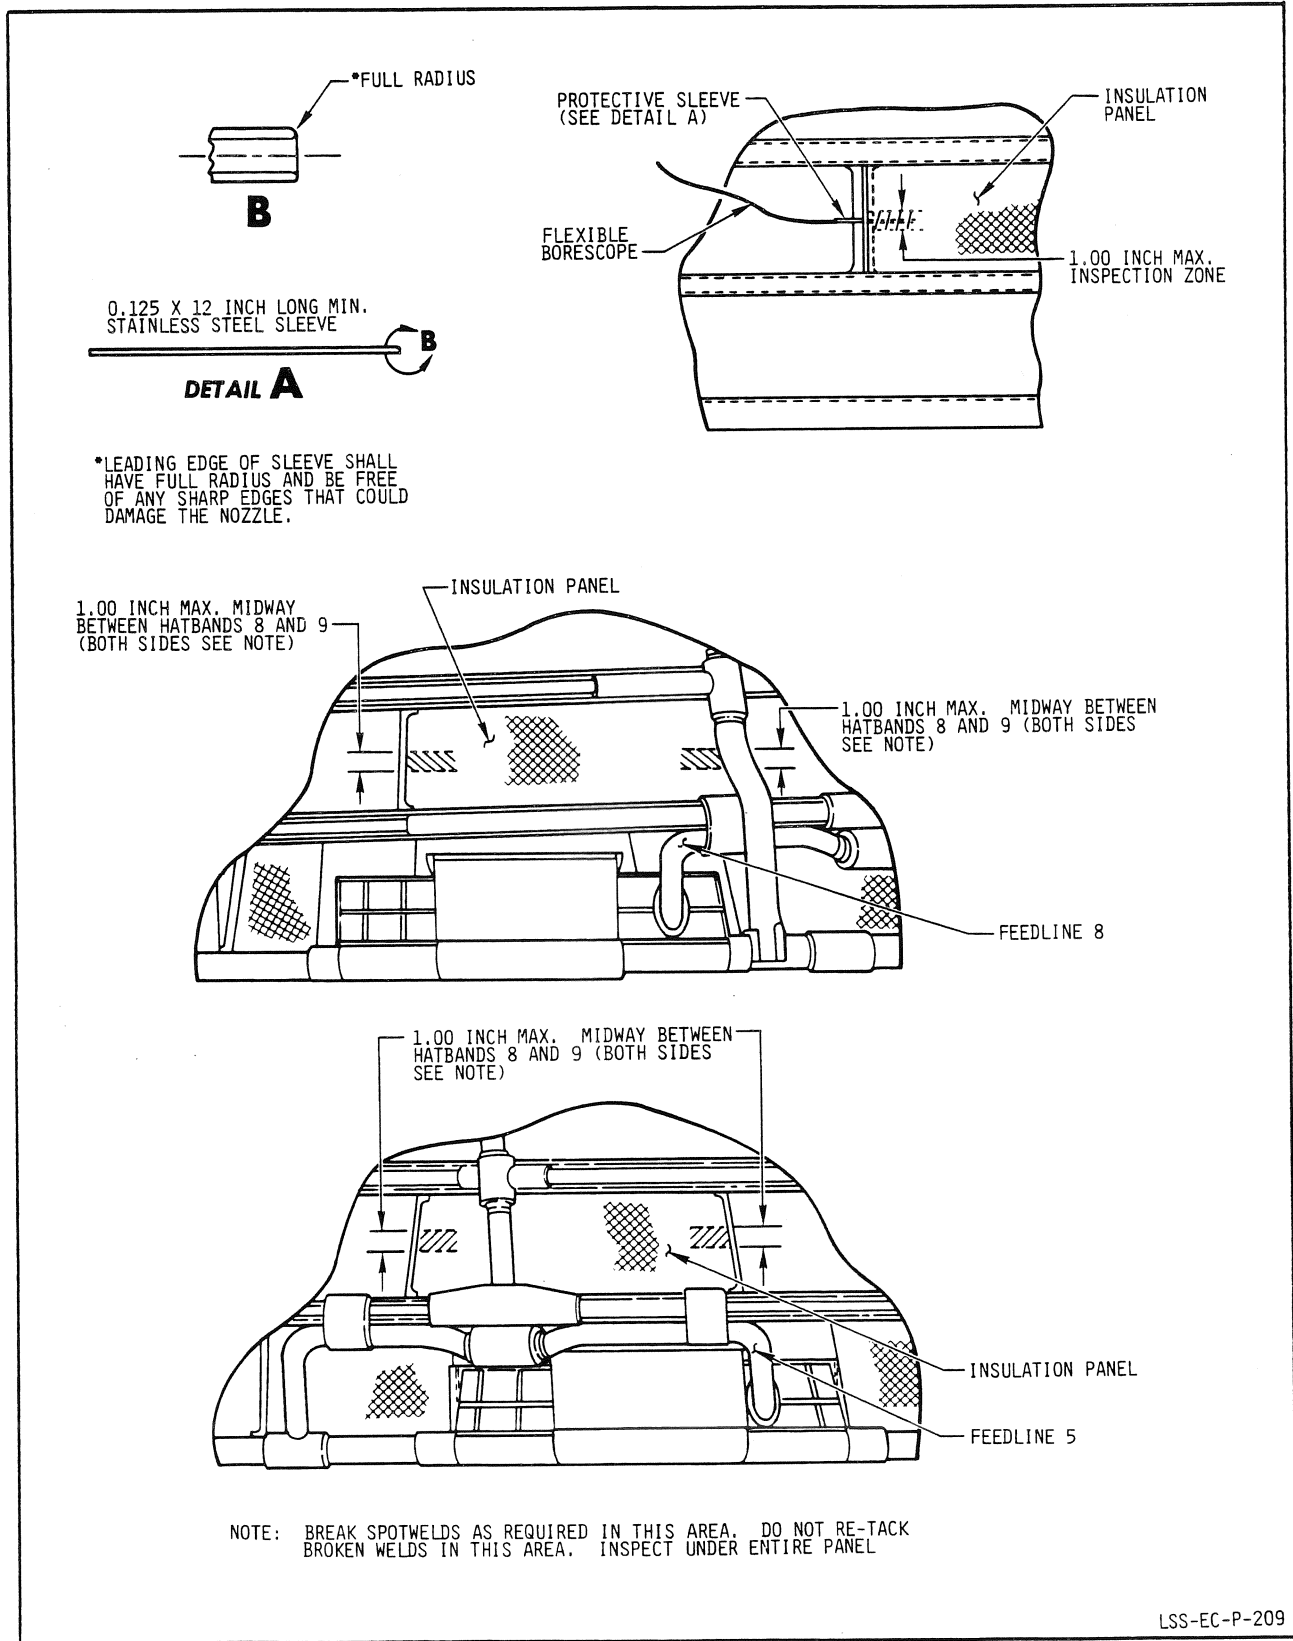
Engine Nozzle Insulation Panel Inspection Zone (Sheet 2 of 2)
